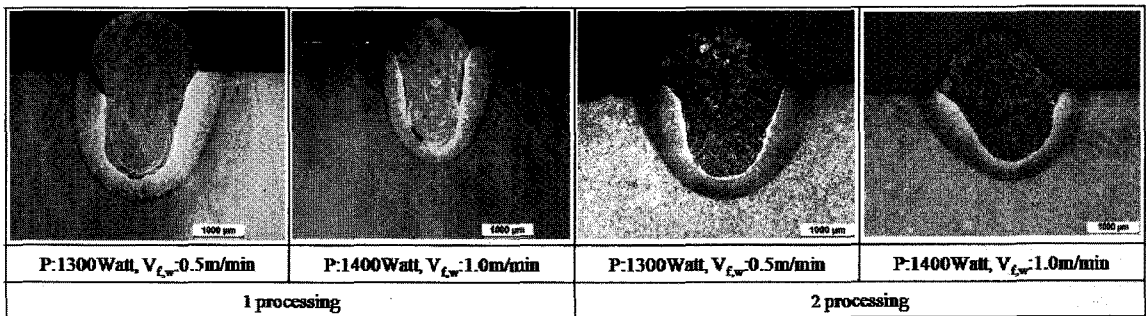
Cross-section of plastic mold steel after laser repair welding
